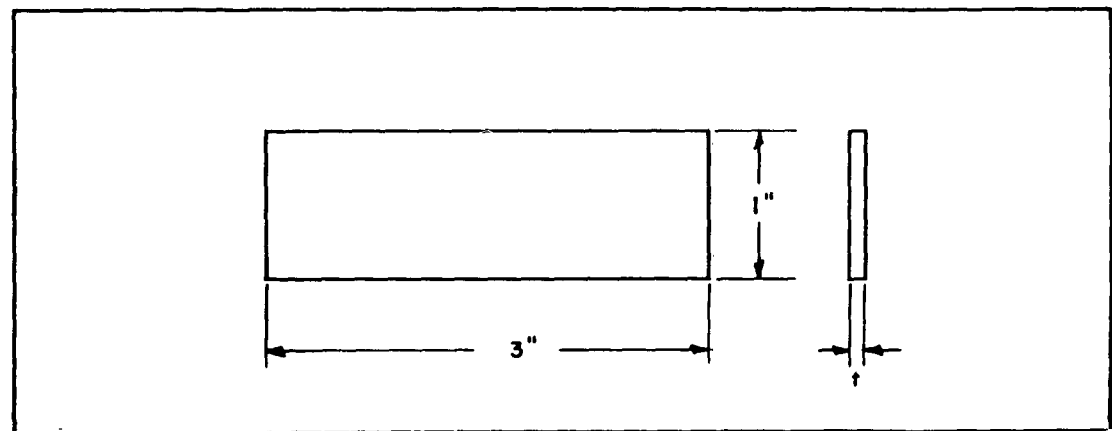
Sheet 105-Degree-Angle Bend Test Specimen
